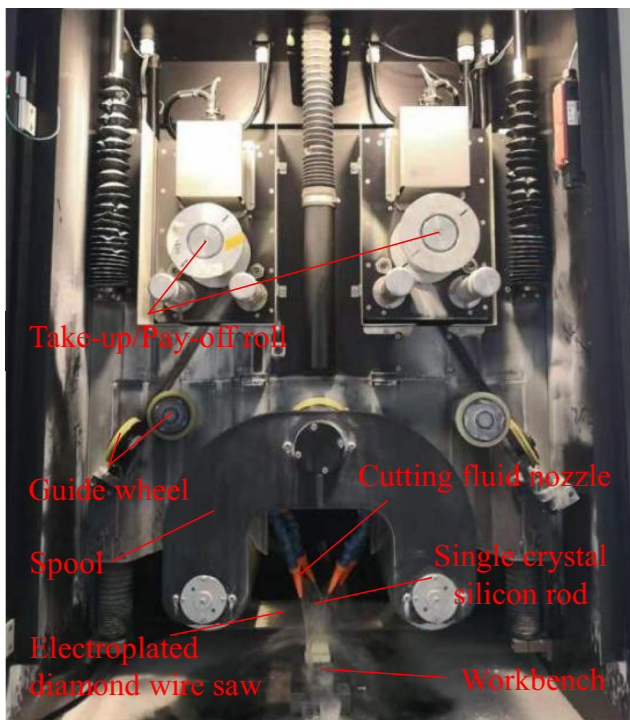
Structure of the Meyer Burger RTD6800 multi-wire sawing machine
